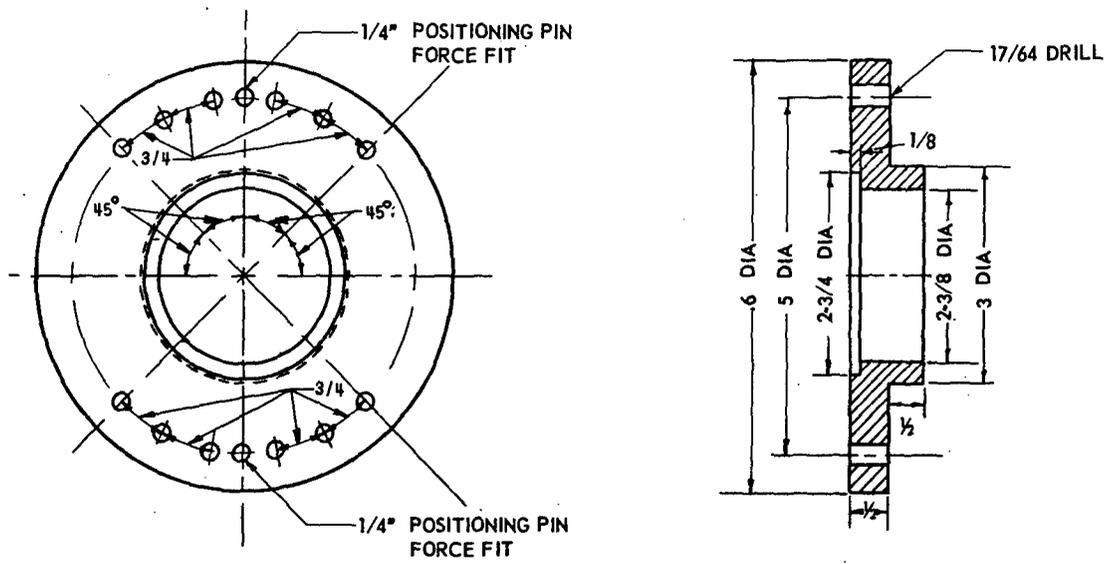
A. Upstream Flange of High-Pressure Sample Holder.
